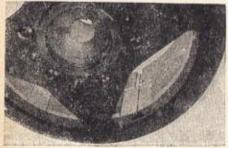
Centre distance of the control pole plates in the flywheel to be marked on the casing of the latter or on the cardboard insert visible from outside
